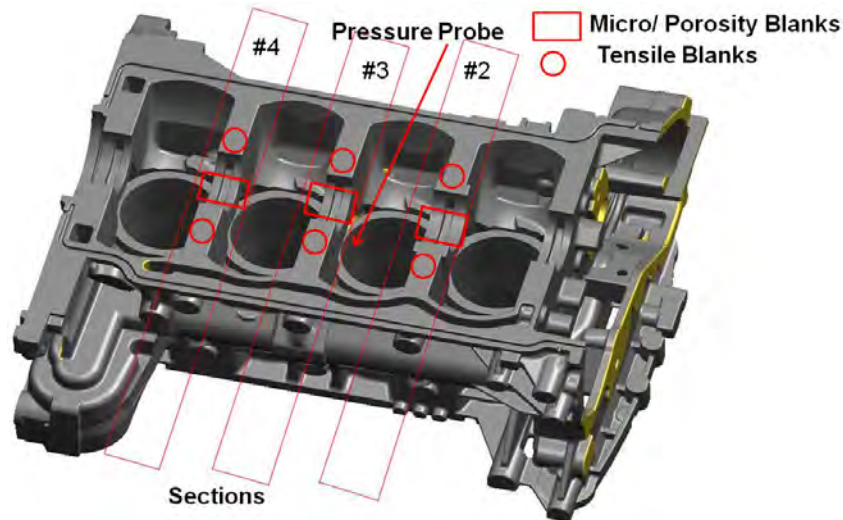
Thermocouple, Tensile and Porosity Blanks and Pressure Probe Locations
